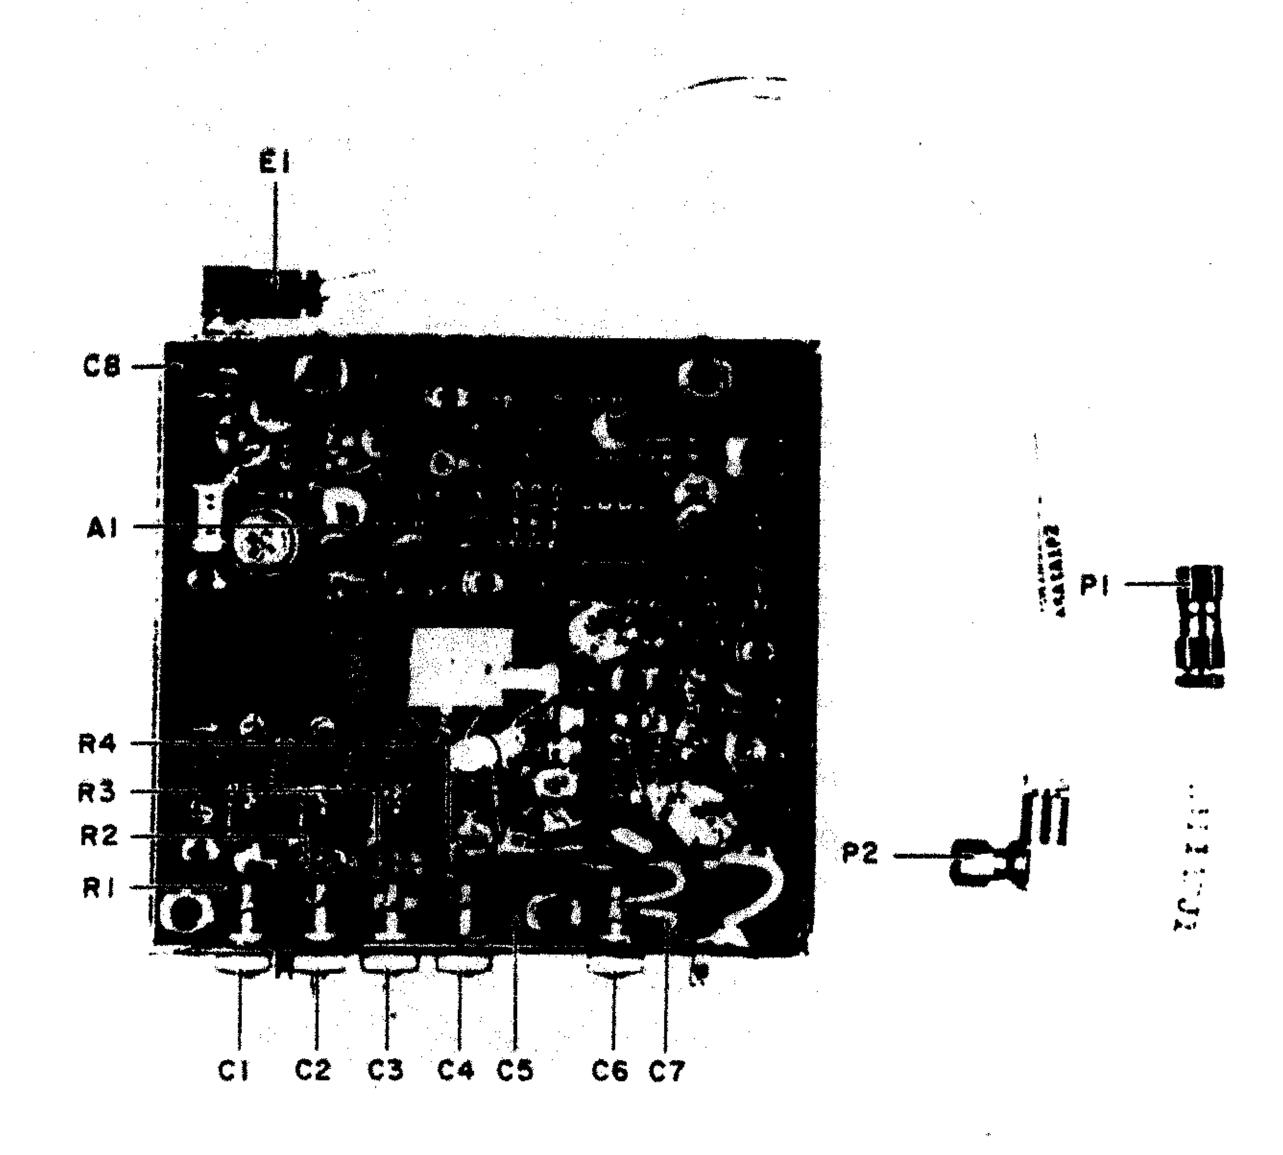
Type 791629 1st LO VCO Assembly (A5A1A1), Location of Components
